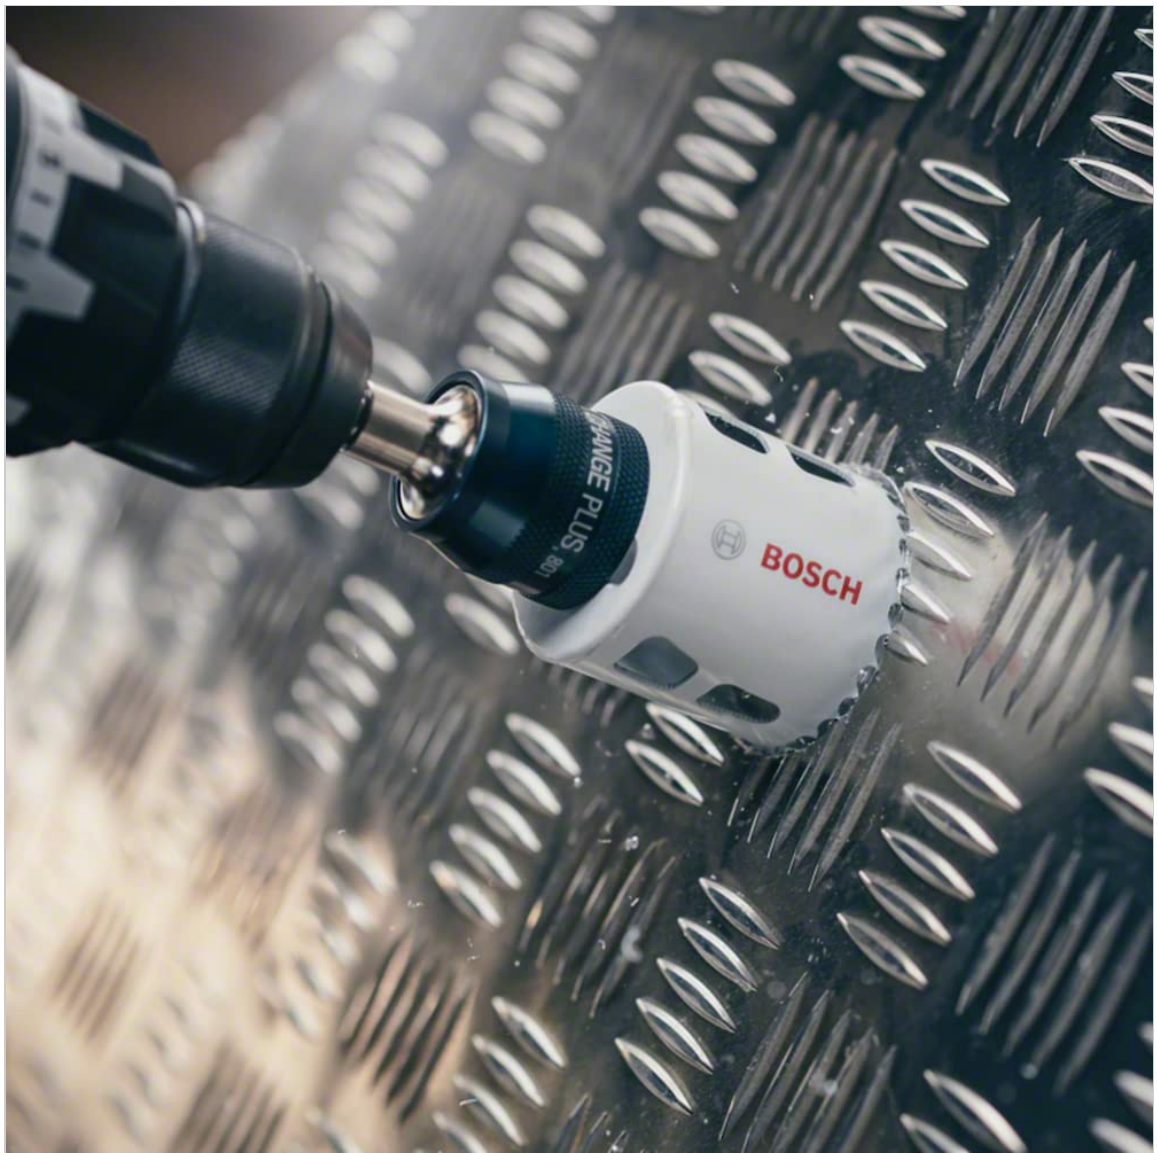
Demonstrating the adapter and hole saw in use, cutting through a metal surface.
